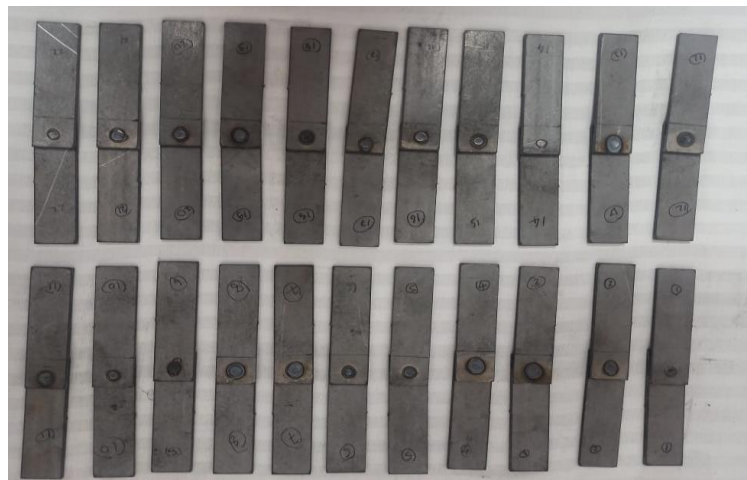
shows the 22 sample after resistance spot weld joint
